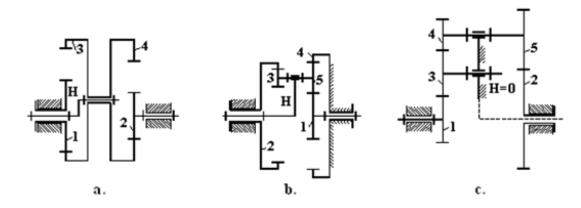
Planetary gearings a) simple differential planetary gearing; b) mono-mobile planetary gearing; c) gearing based on fixed axles
